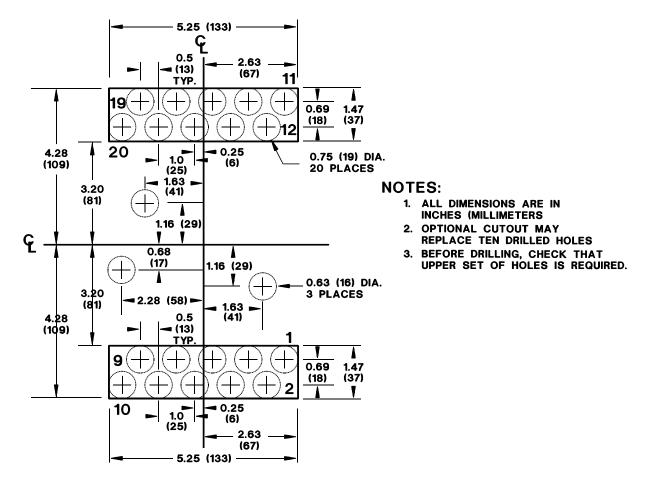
Panel Drilling Diagram, Projection Mounting, Rear View
